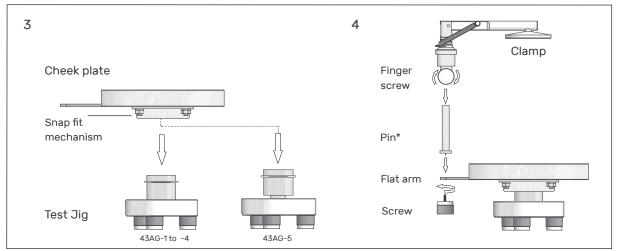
Mounting the cheek plate and the spring-loaded clamp.
